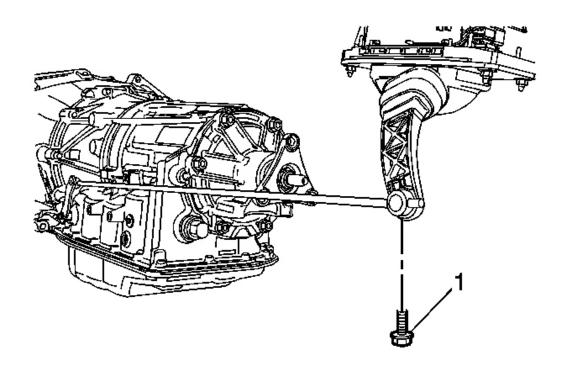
Shift Control Linkage Rod Bolt Courtesy of GENERAL MOTORS CORP.
